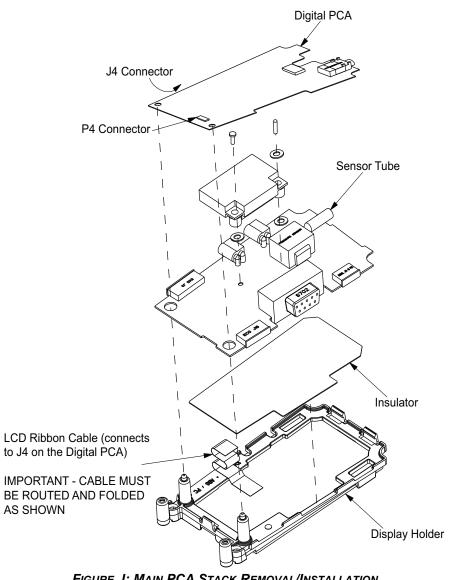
FIGURE J: MAIN PCA STACK REMOVAL/INSTALLATION
